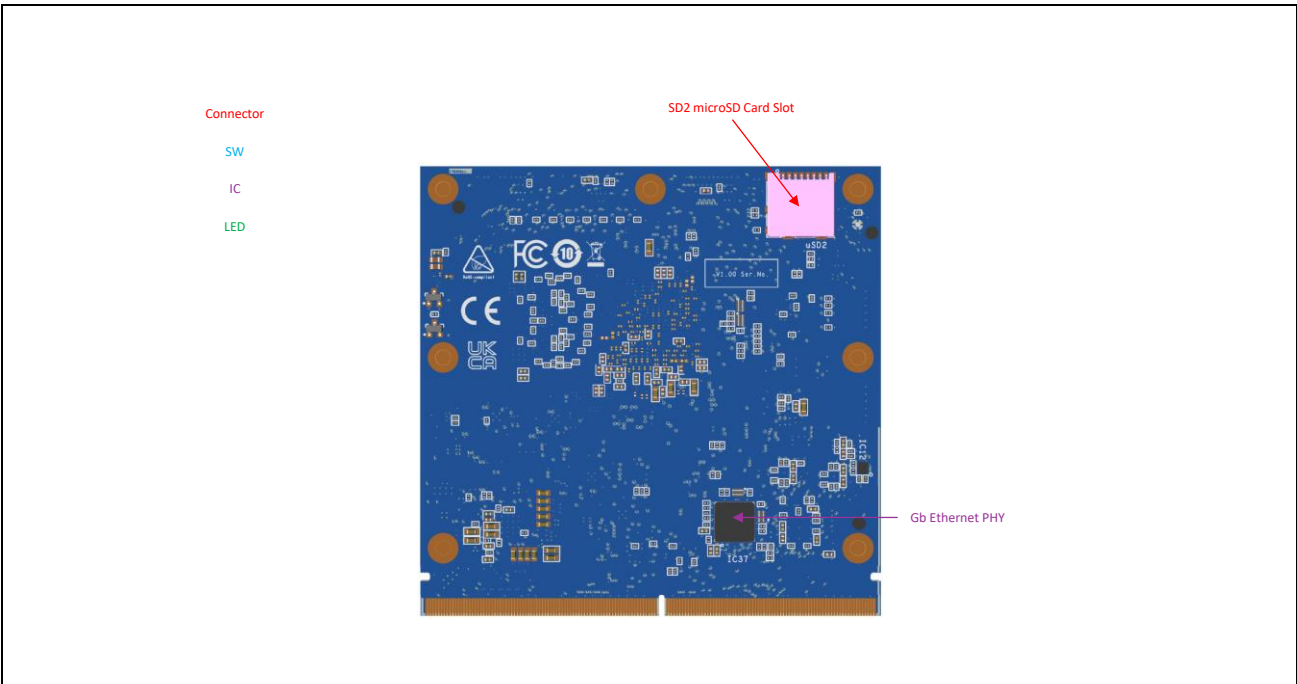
RZ/G3E SMARC Module Board Bottom View
